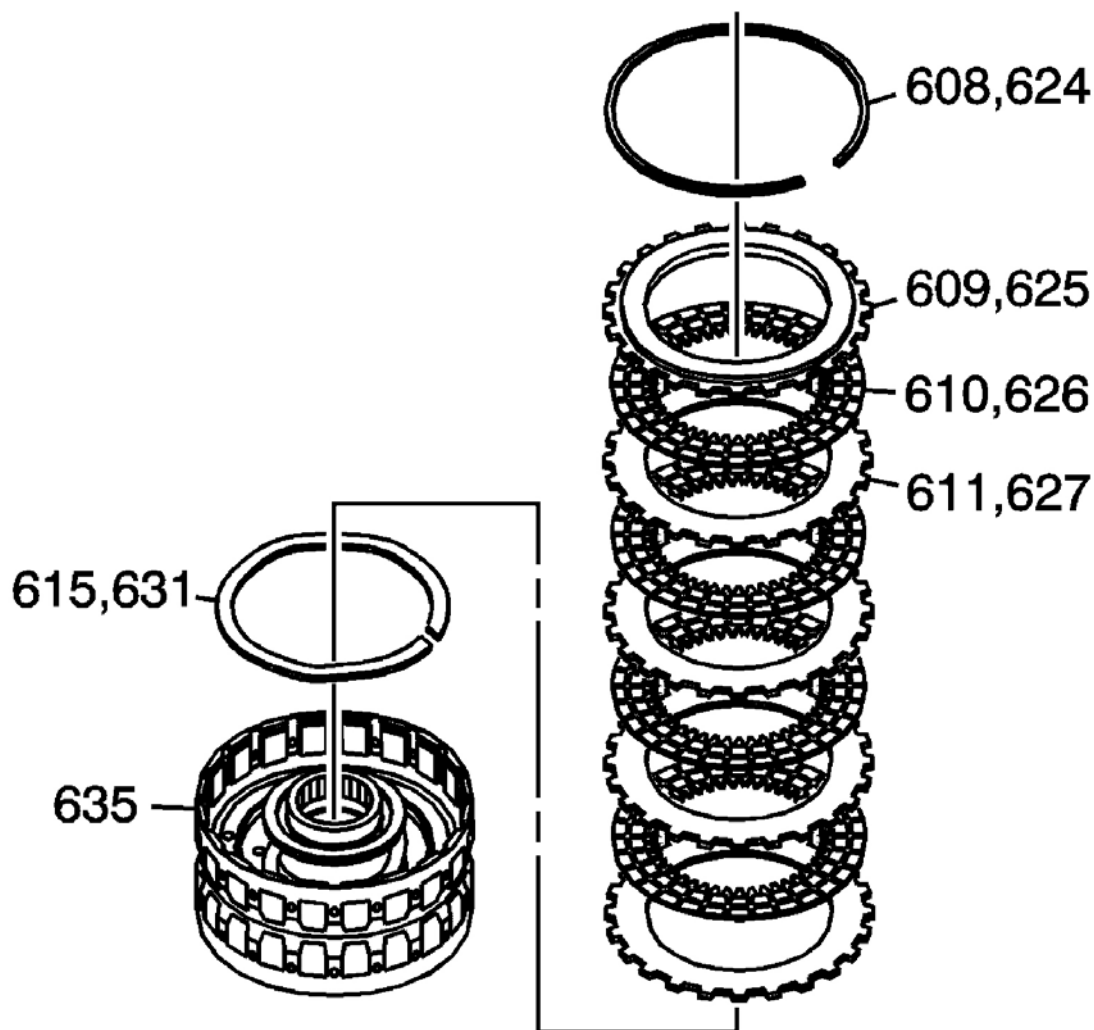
Clutch Backing Plate Retaining Ring & Components Removed
